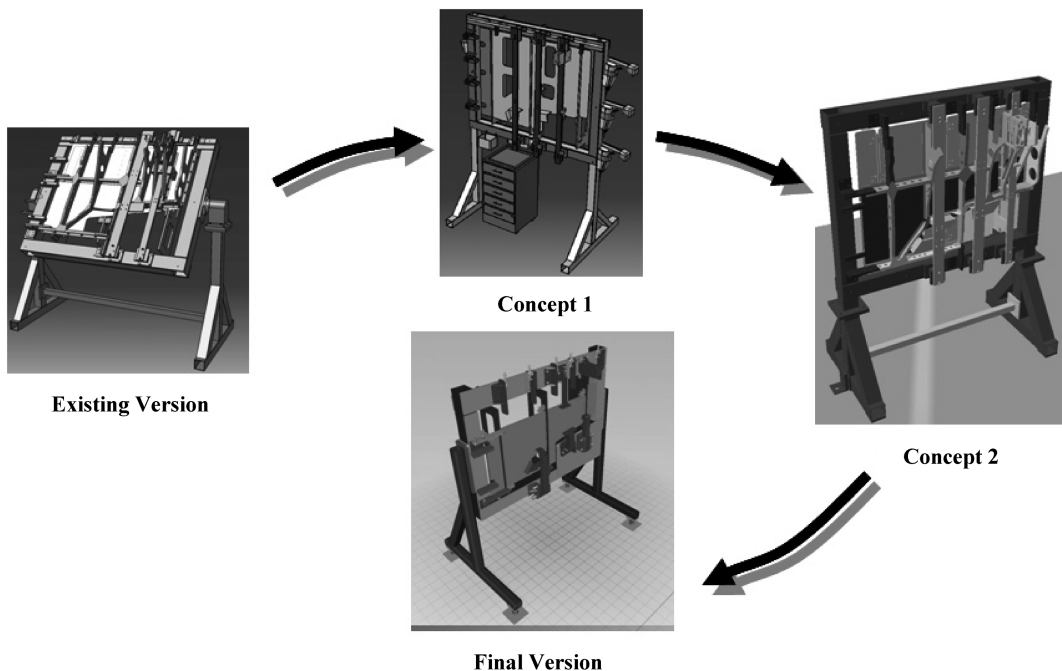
Tool DFMA: development process concept for new apron and uplock assembly jig.
